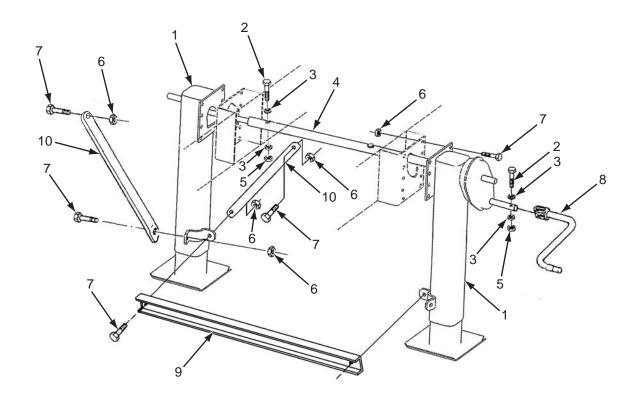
LANDING GEAR AND MOUNTING HARDWARE
